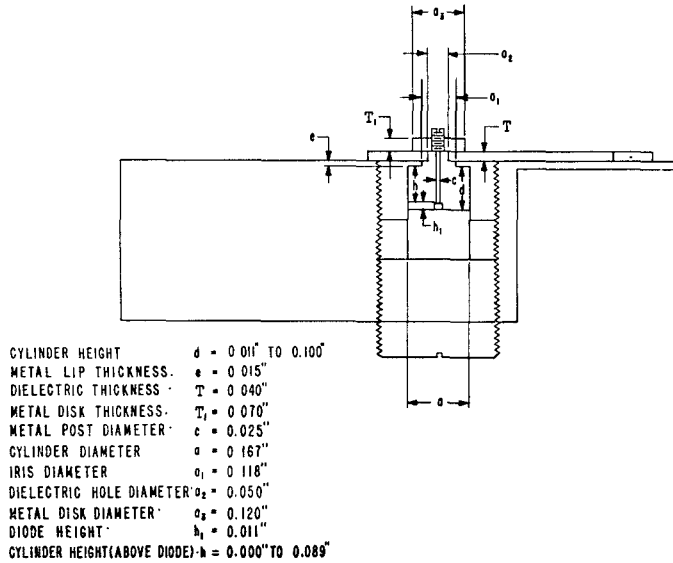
Gunn oscillator assembly, side view, showing dimensions.
